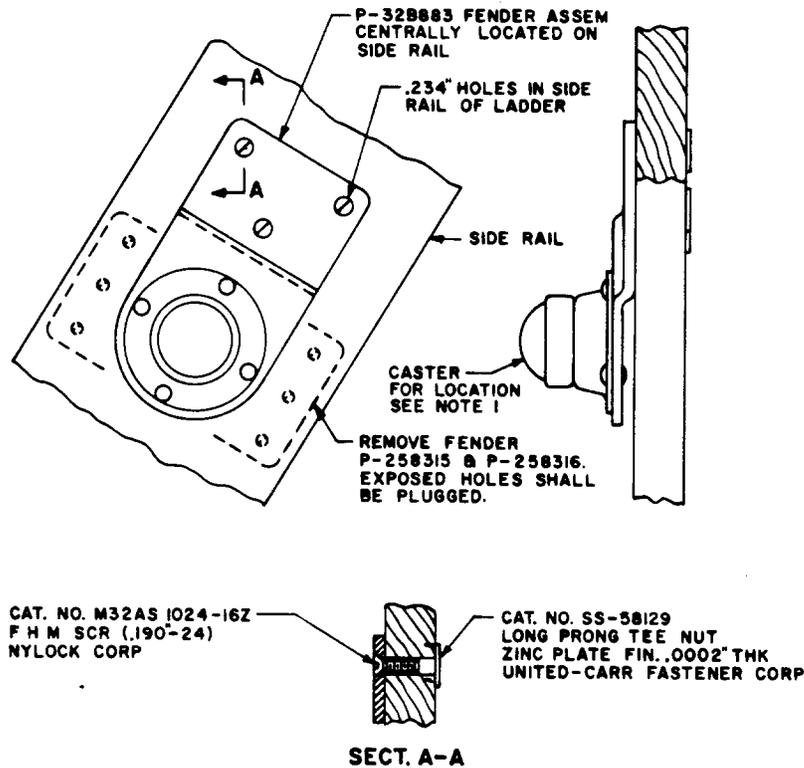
Platform- and Portable-Type Rolling Ladder Wheel Assemblies
